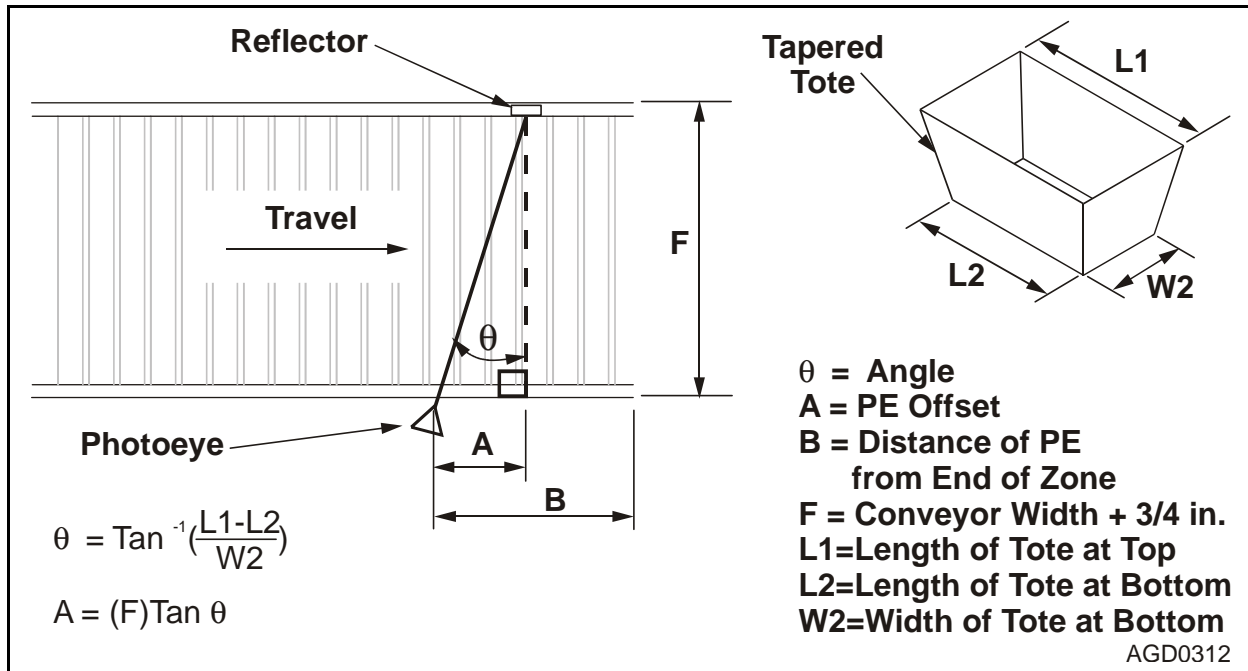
11 Reflector Placement for Sequential Zone Control - Tapered Totes
